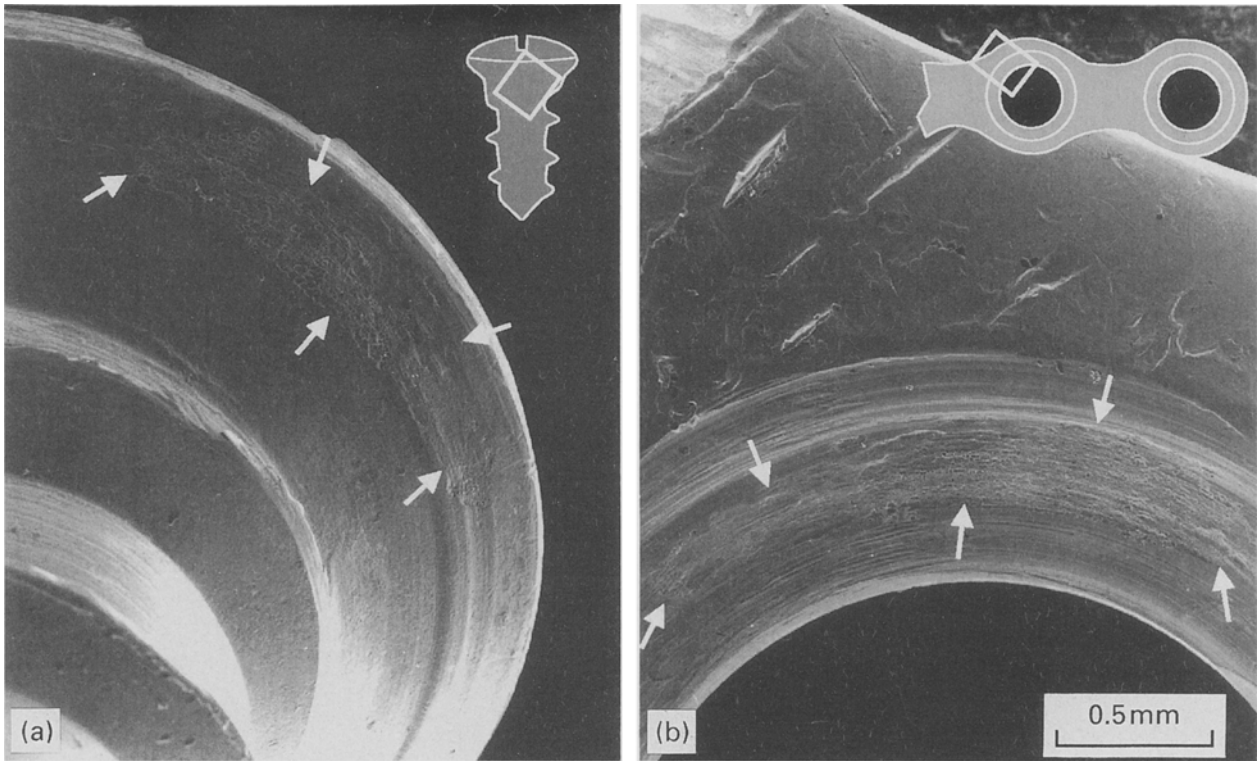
“Kissing defect” showing conformity between corrosion defect on the chamfer underside of the screw head (arrows) and plate hole countersink corrosion defect (arrows).
